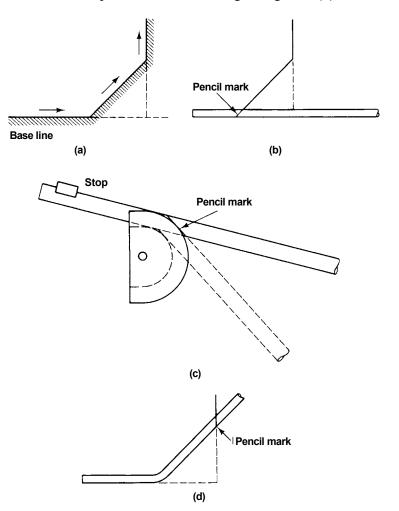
Marking out sets round an angle: (a) template; (b) marking out first set; (c) locating pipe in the machine; (d) marking out second set
